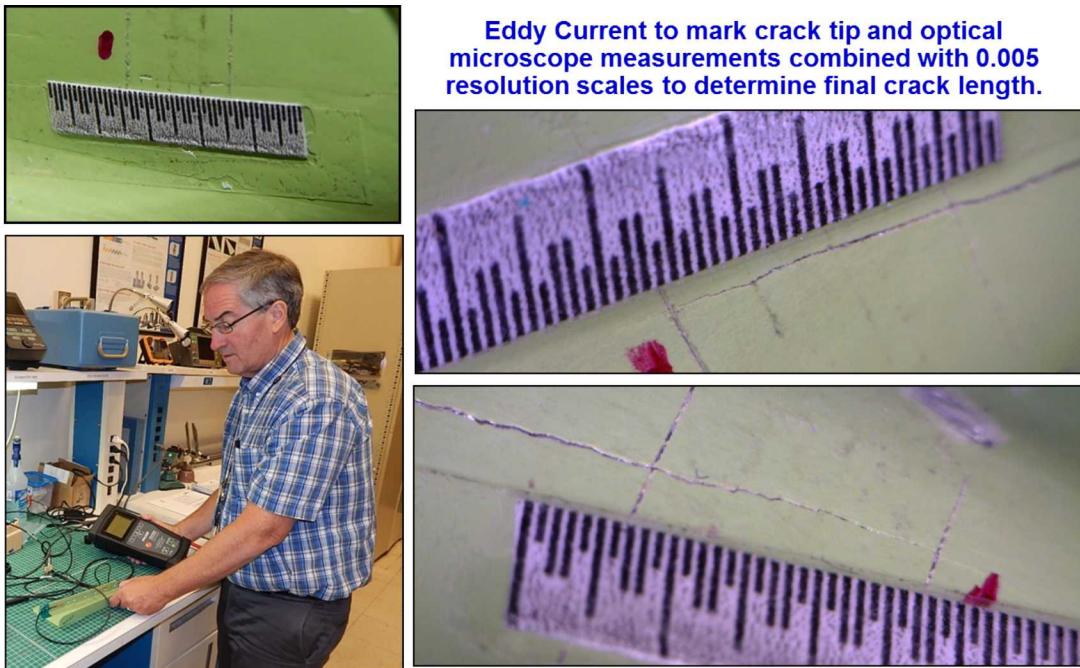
Eddy Current Inspections to Measure Crack Length
